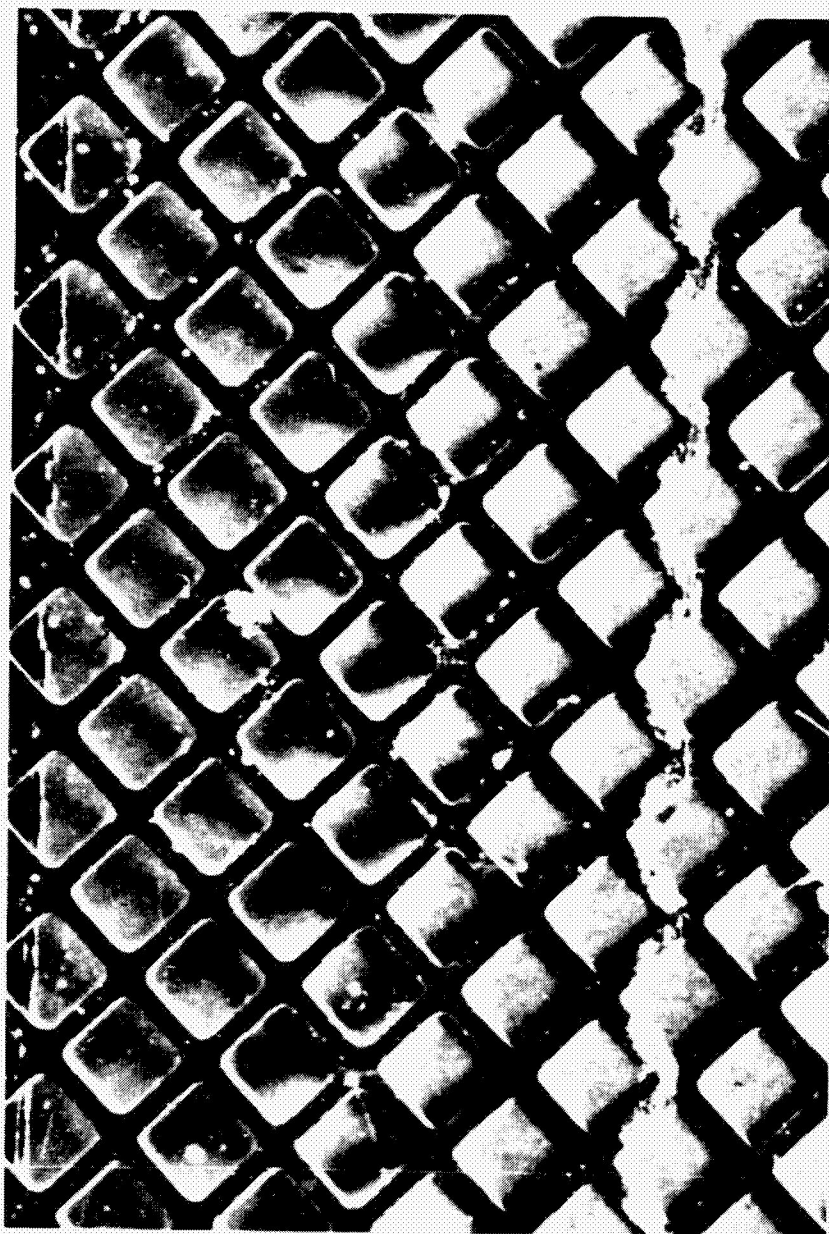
Close-up of Welded Back of 0.12 mm Cell.
